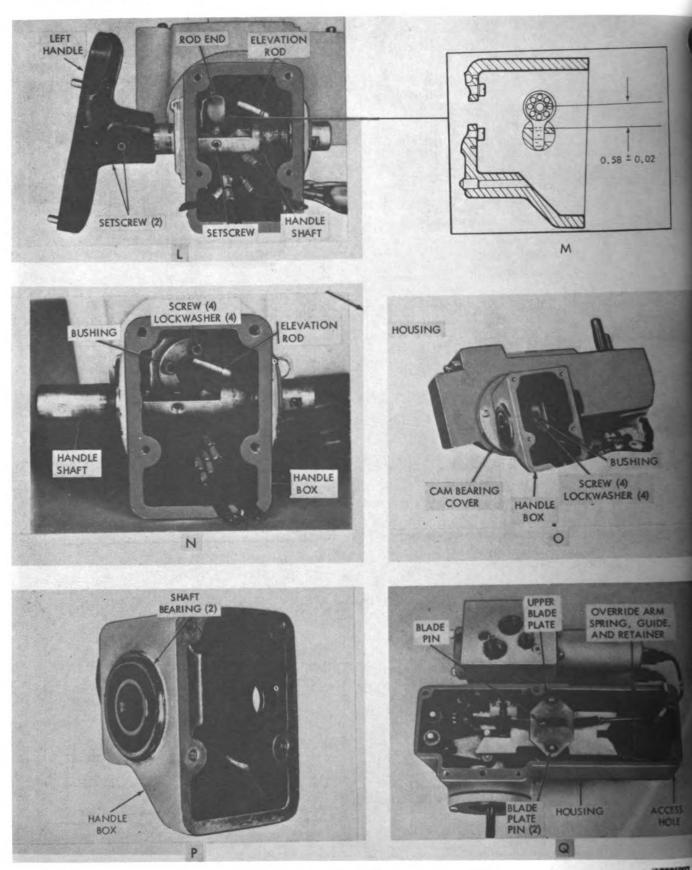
Gunner's control disassembly or assembly (3 of 6).
